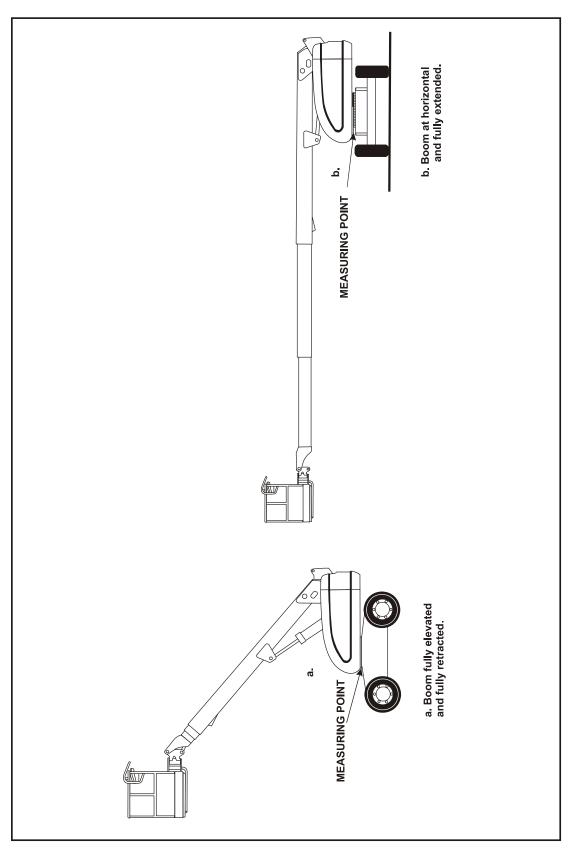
Swing Bearing Tolerance Boom Placement (S Models)
